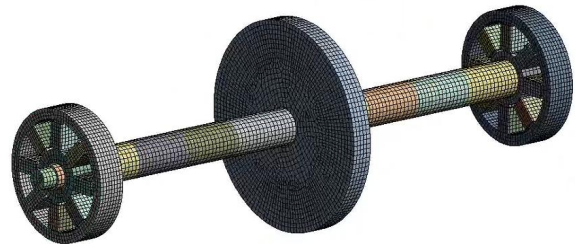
Finite element mesh model of the active magnetic bearing rotor system
